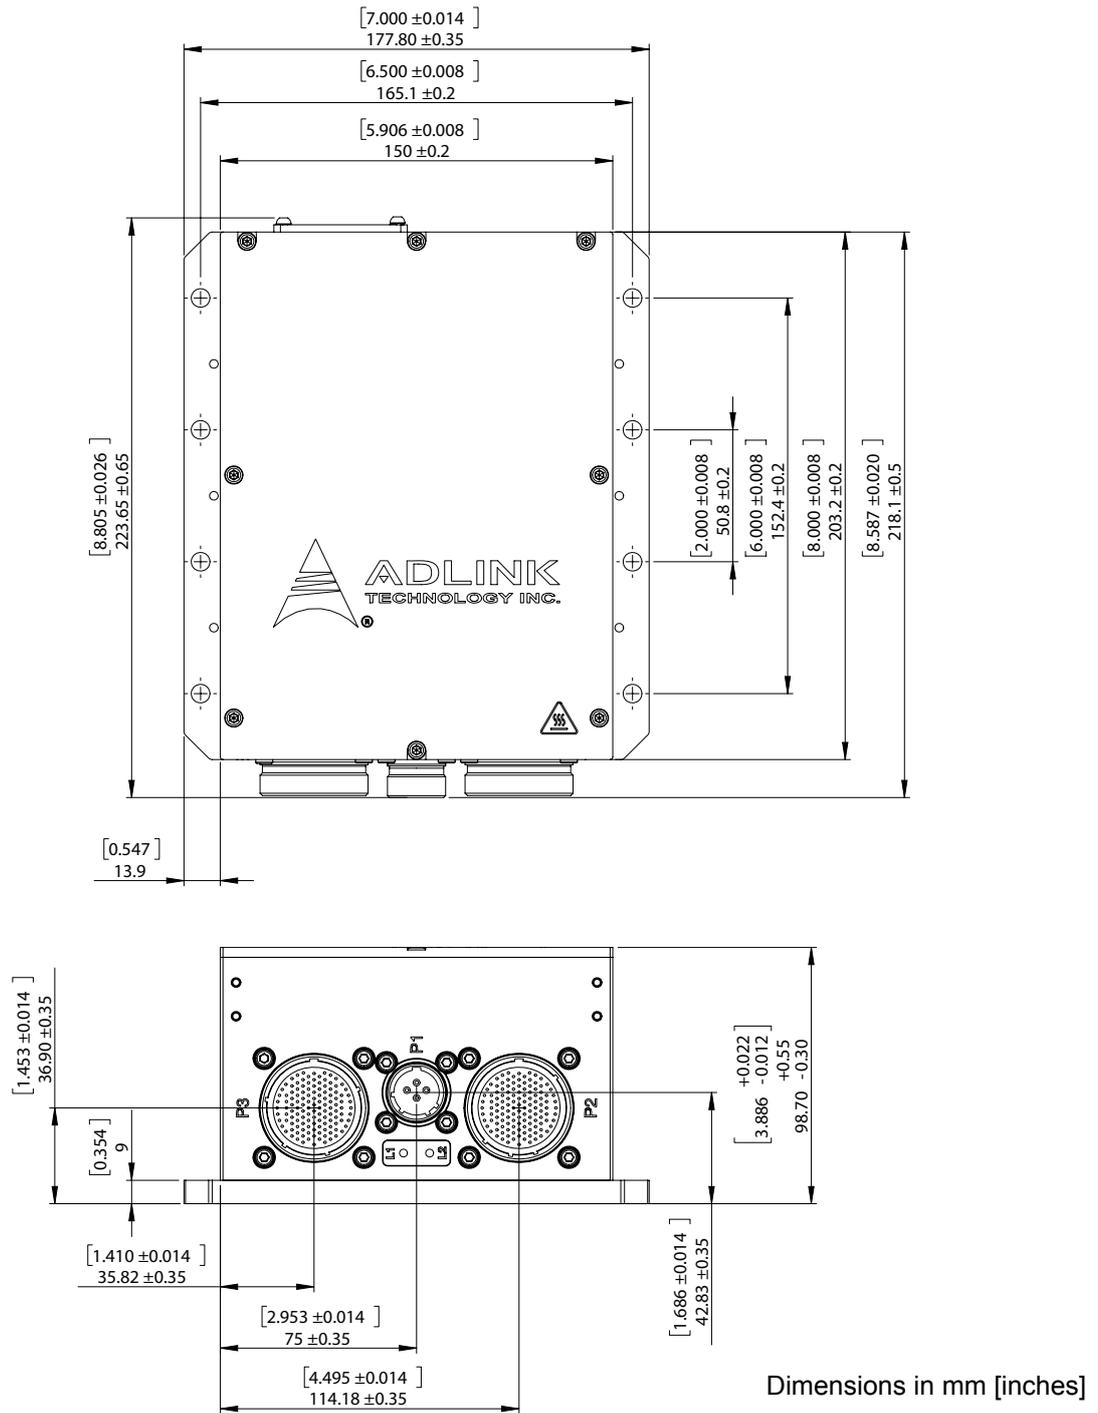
Top and Front Views of “MC” Enclosure with Mounting Dimensions
